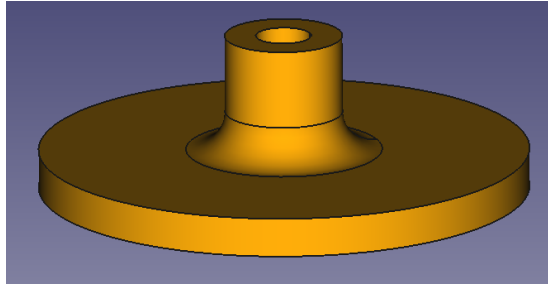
Machined copper adapter part model which thermally couples the transistor outline package (TO-8) header stud to the copper core of the forced convection heat sink.
